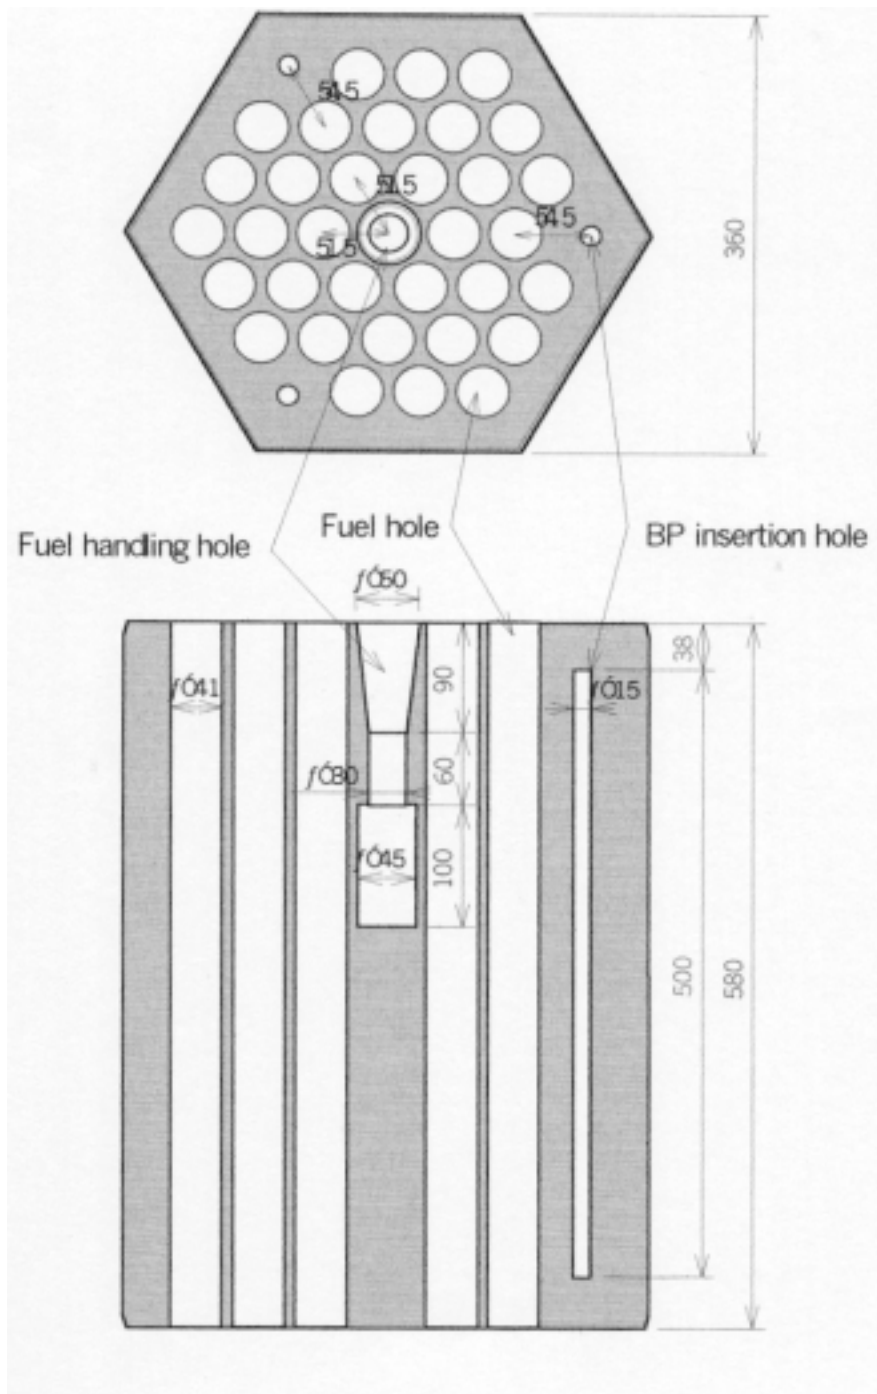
Fuel block for 33 pin fuel assembly.
